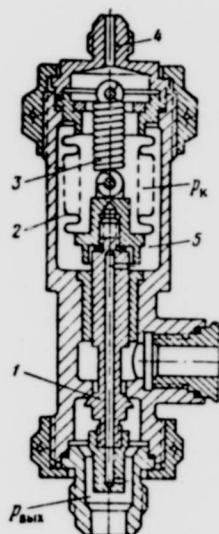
Reduction valve with variable adjustment and bellows sensing device: 1 - valve; 2 - bellows; 3 - spring; 4 - pipe connection for supply of command pressure; 5 - bellow chamber.
